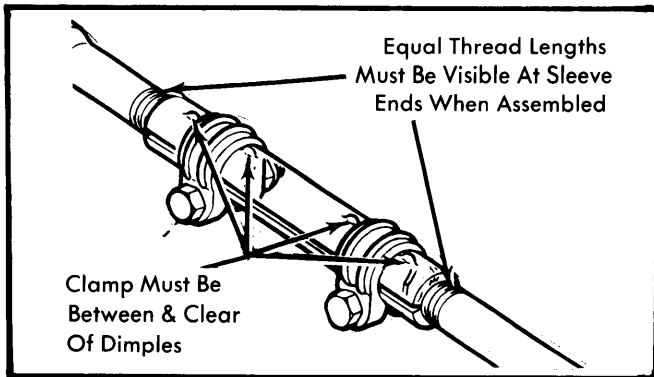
Tie Rod Clamps Between Dimples (General Motors Shown).
